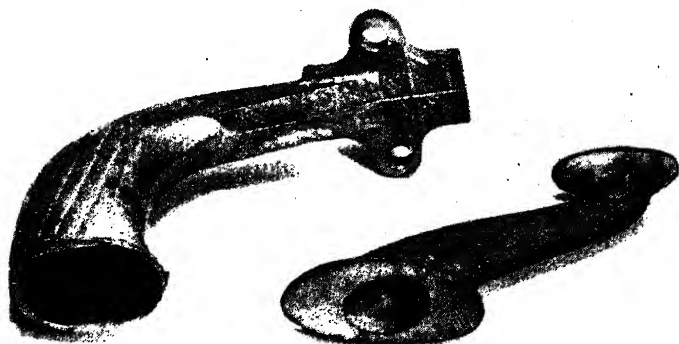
Undercut die-castings. Holes formed by rotating cores
